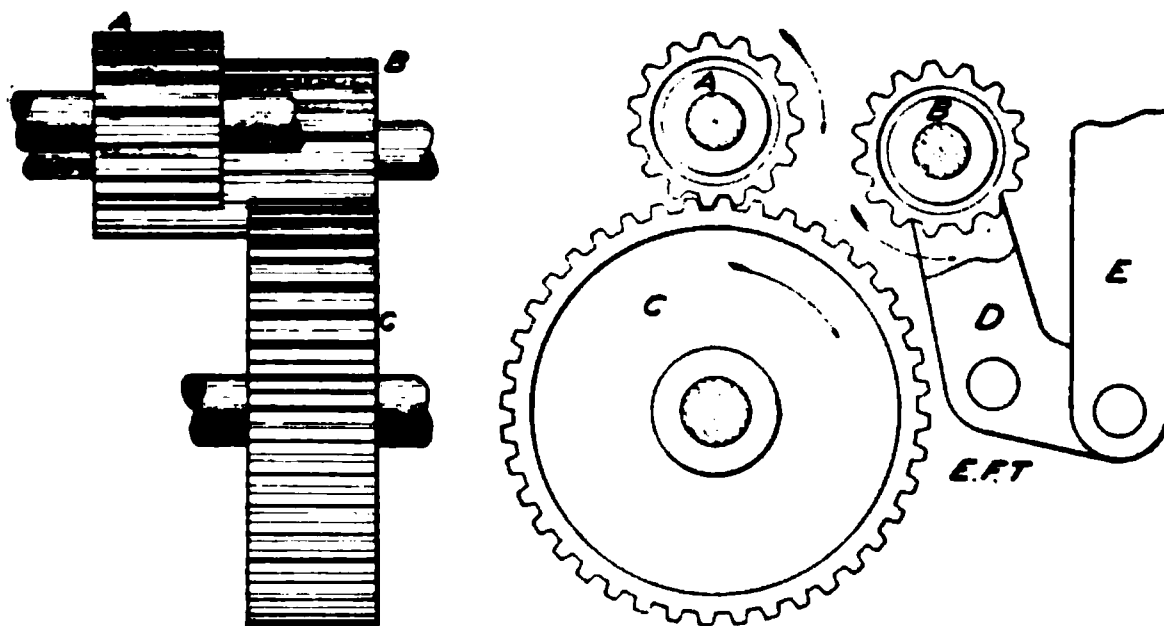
Details of the Reverse Gear used on the Daimler-Maybach Carriages. The change speed gear used on these carriages is identical with that used on the Panhard-Levassor, except for the bevel gear reversing arrangement. Instead of using this device, the pulley, *A*, on the main shaft, is thrown into gear with pulley, *C*, upon the second shaft, through the spur pinion, *B*, carried on the bell crank, *D*, and moved in or out of gear by lever, *E*. Thus the motion of *A* is transmitted to *C* in the reverse direction, although none of the gears on the first and second shafts may be in mesh.
